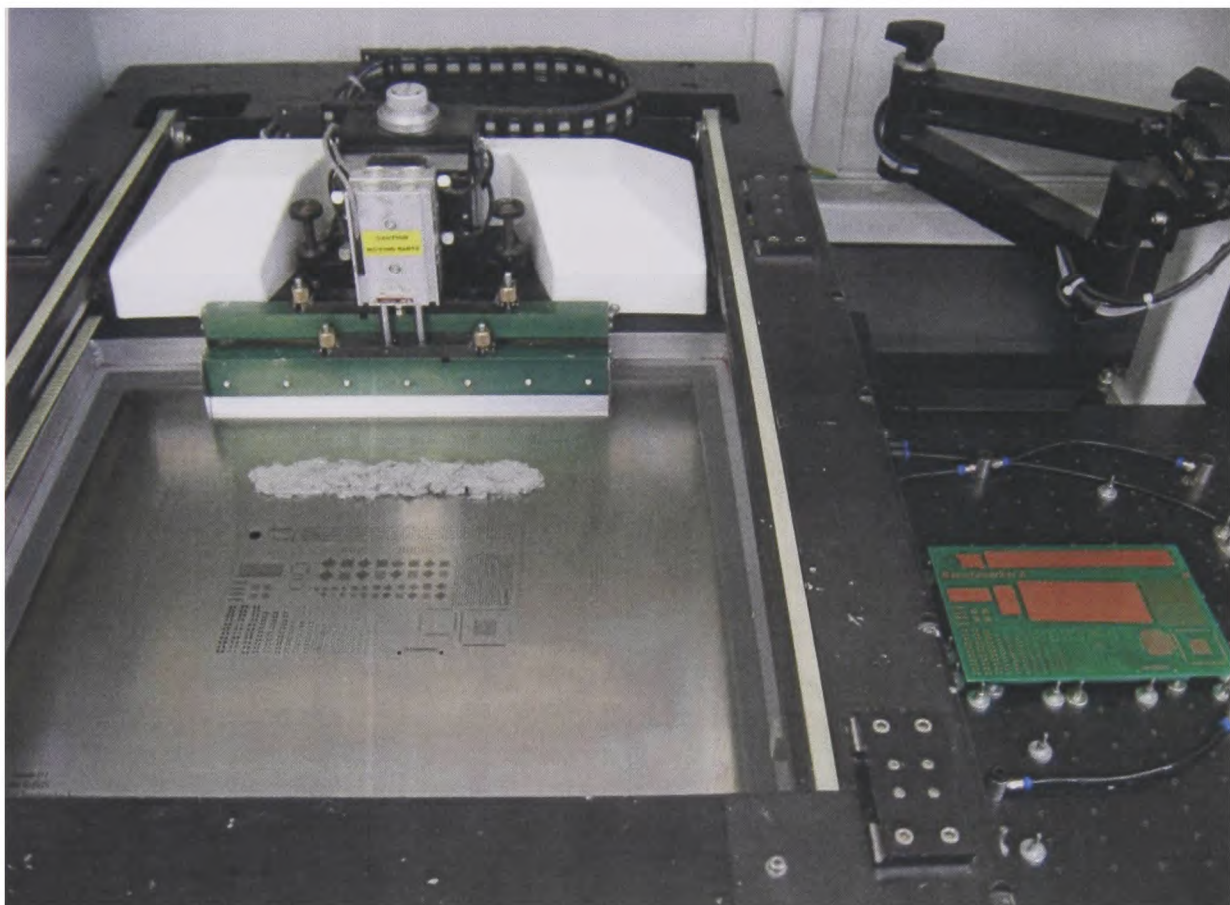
DEK stencil printing machine fitted with Bench Marker II stencil and Bench Marker II PCB.
